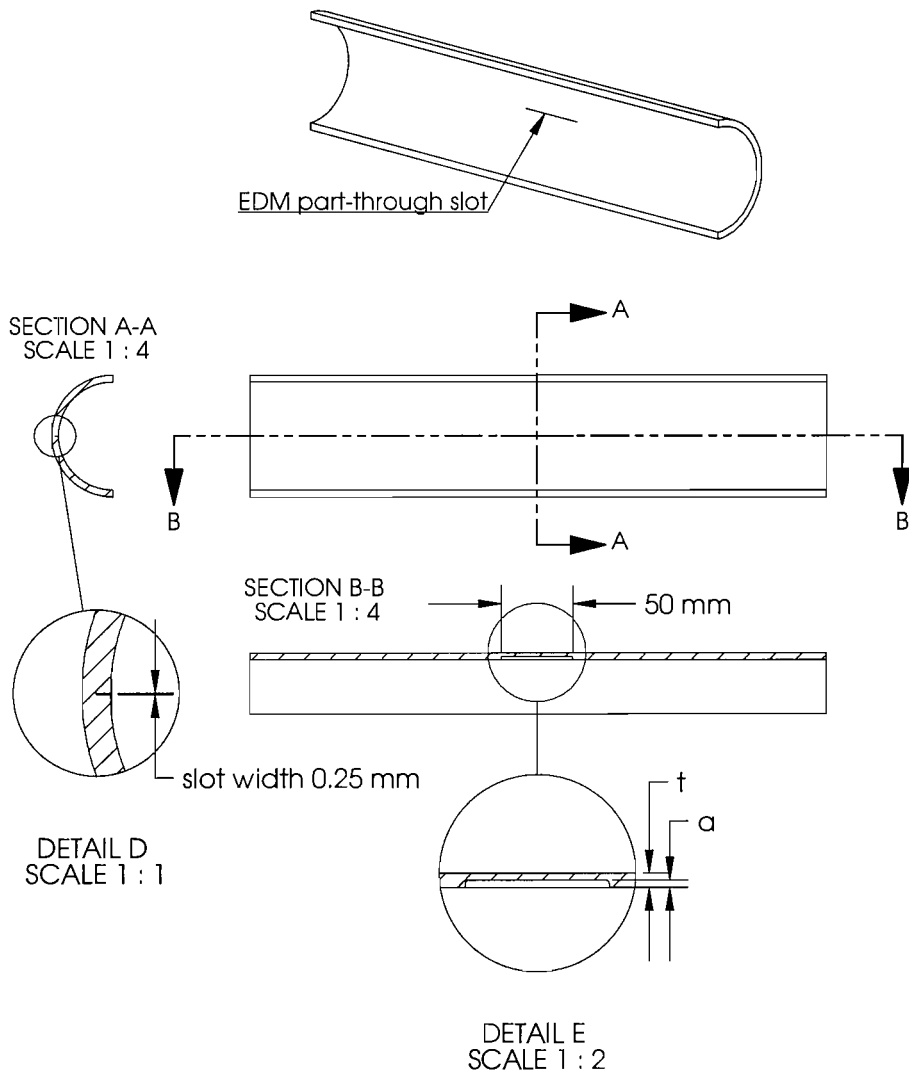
Technical drawing of one section of a damaged pipe specimen
